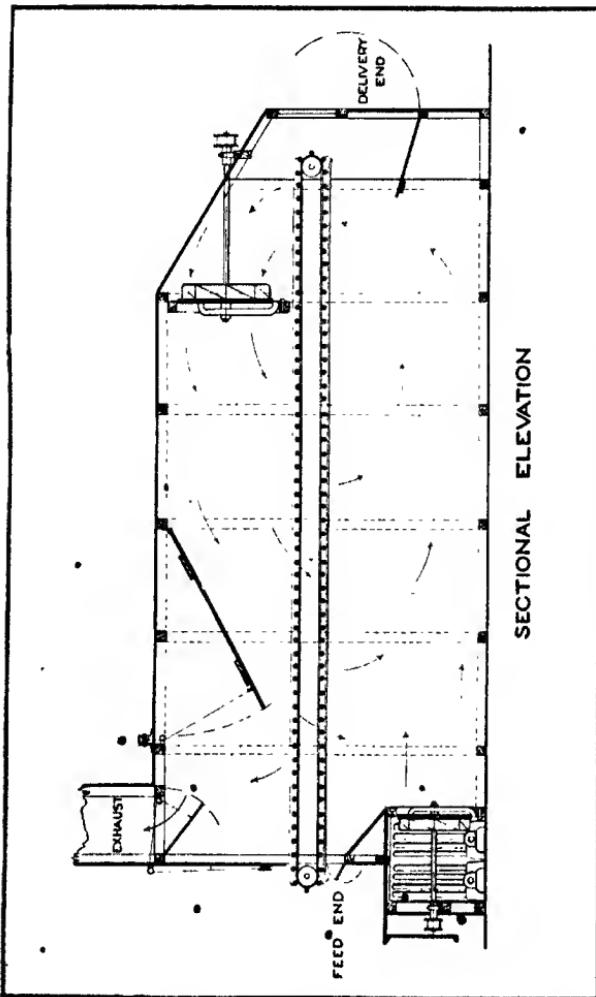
CONVEYOR DRY ROOM. SECTIONAL ELEVATION.
